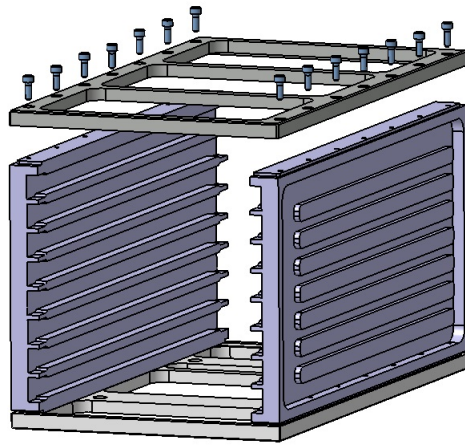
Assembly of the four machined walls to make the DAQ crate
